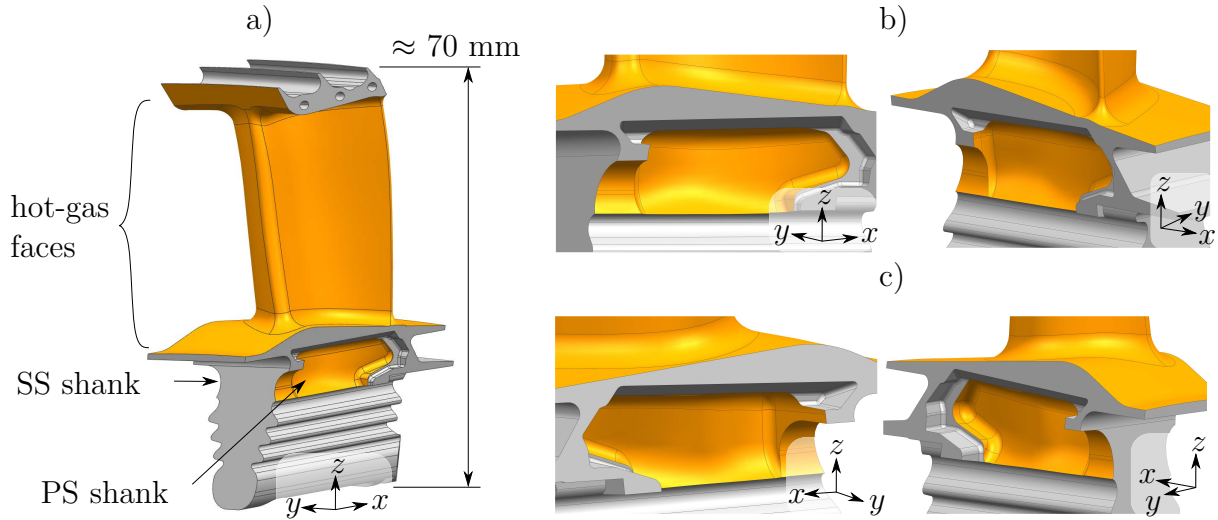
Illustration of a) HPT-blade casting faces with details of b) pressure side and c) suction side shank faces.
